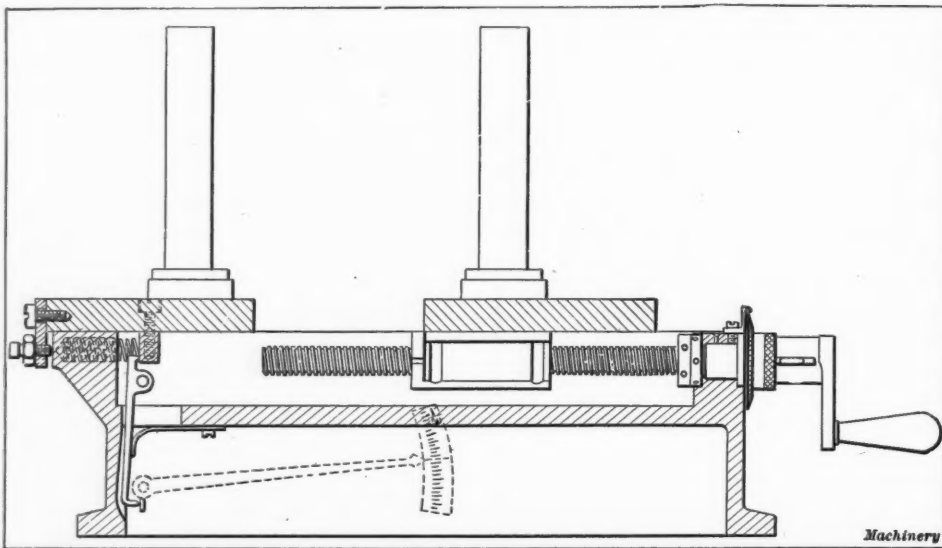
Sectional View showing Construction of Fixture shown in Fig. 10
